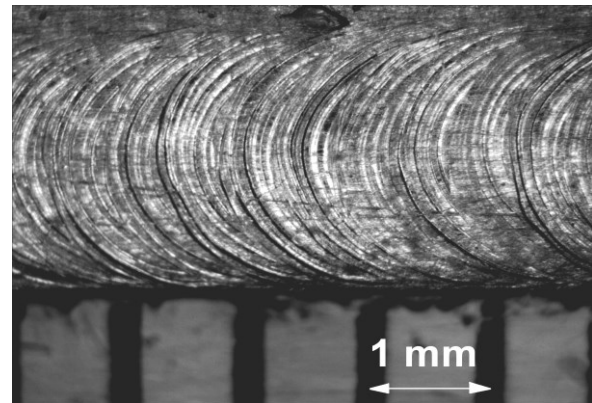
Laser weld bead with smooth ripple pattern.
